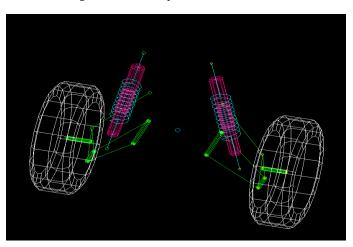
Lotus Suspension (Rear Wheel) Isometric View
